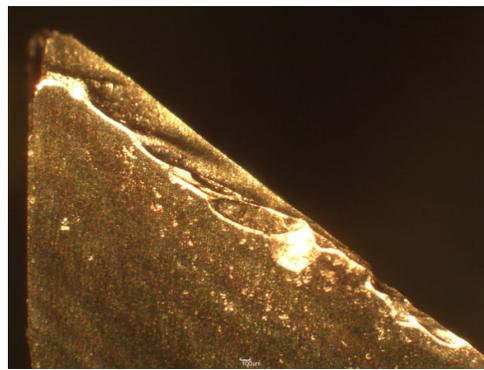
Tool flank wear for treatment 36 m/min and 0.25 mm/rev
